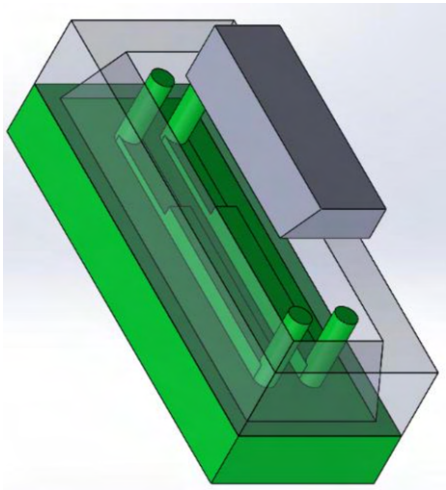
Mould to fabricate the strain device. An extra piece is mounted in the system to make the material reduction above the channels. This piece also includes a draft angle.
